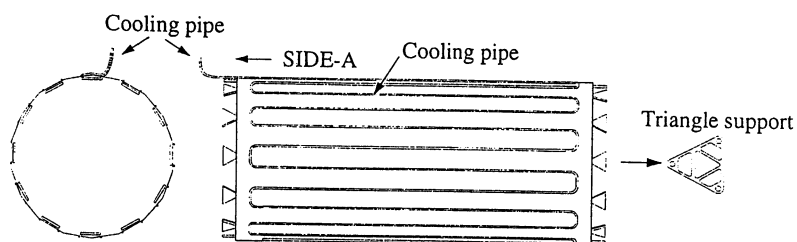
An isometric view of the cooling tube and the coil support scheme.
